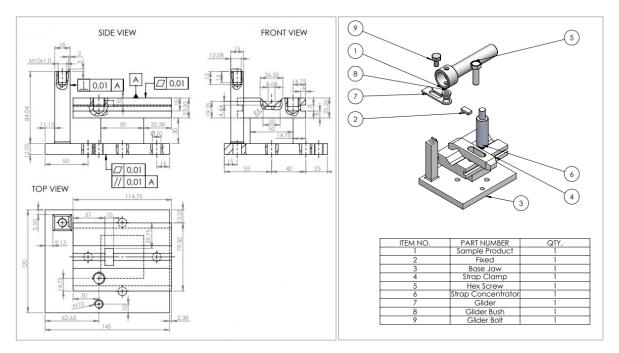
Multiview and exploded view of sharf drilling jigs and fixtures.
